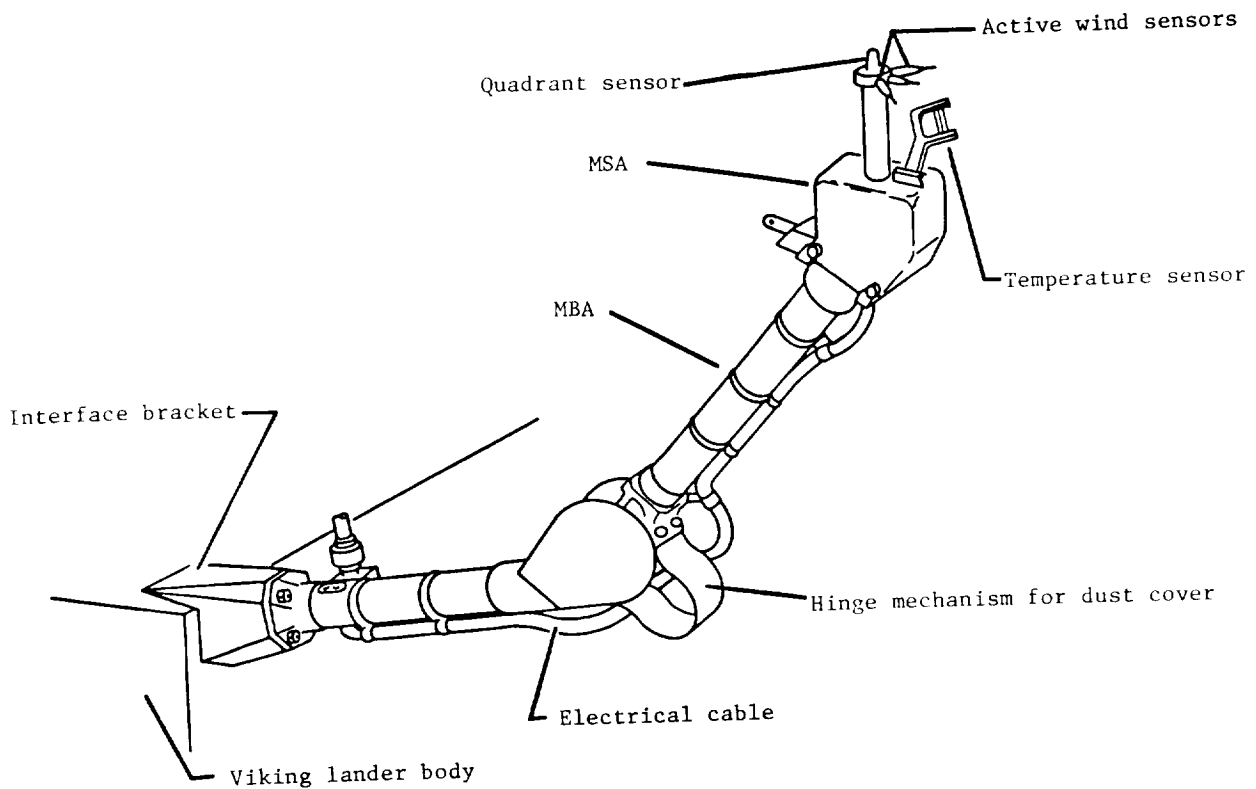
Meteorology instrument boom assembly. Deployed configuration.
